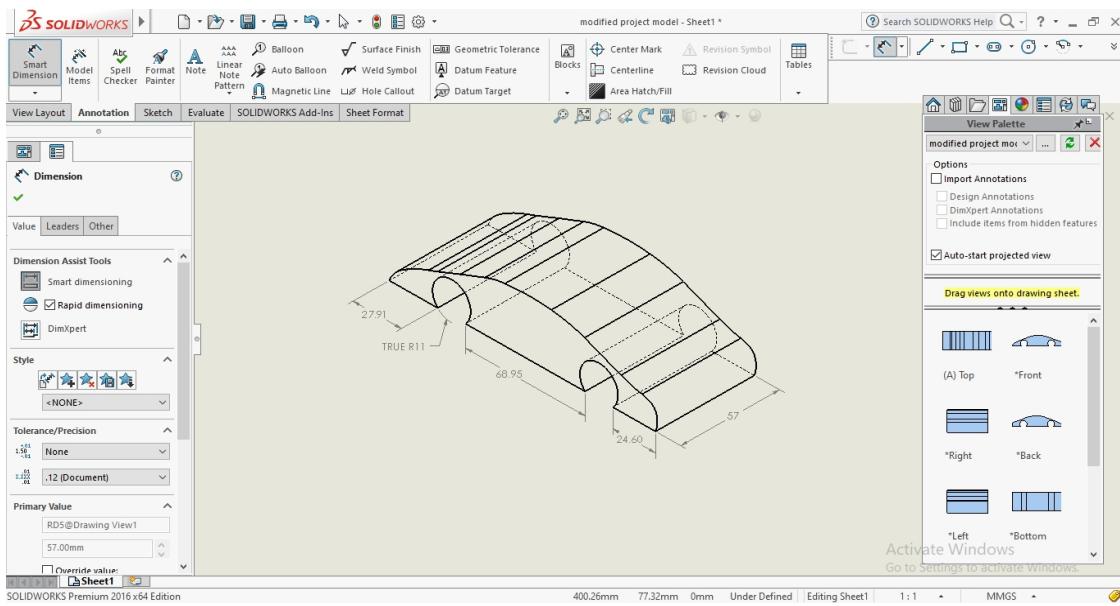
Drag Minimised Model Dimensions with Isometric View
